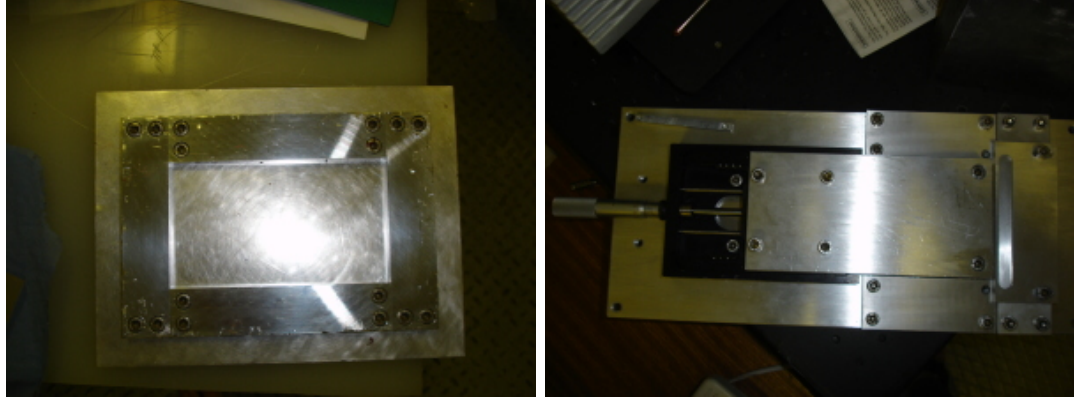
The mould, shown on the left, was used to create sheets of RTV at a set thickness. On the right is the cutting board used to cut the RTV sheet to the size required for the pads.
